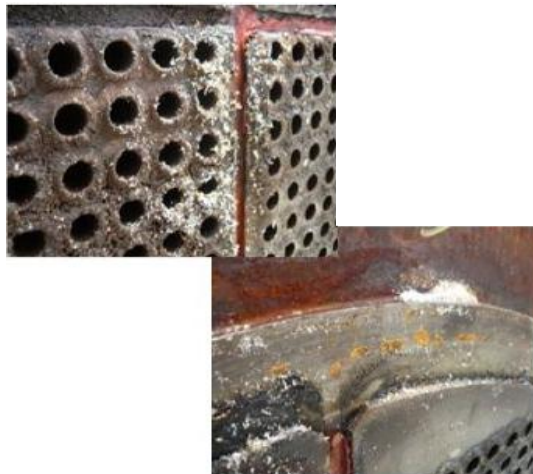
View of tubes sheet found with thick layer of product residue and white residue stick at tubes sheet [12]
